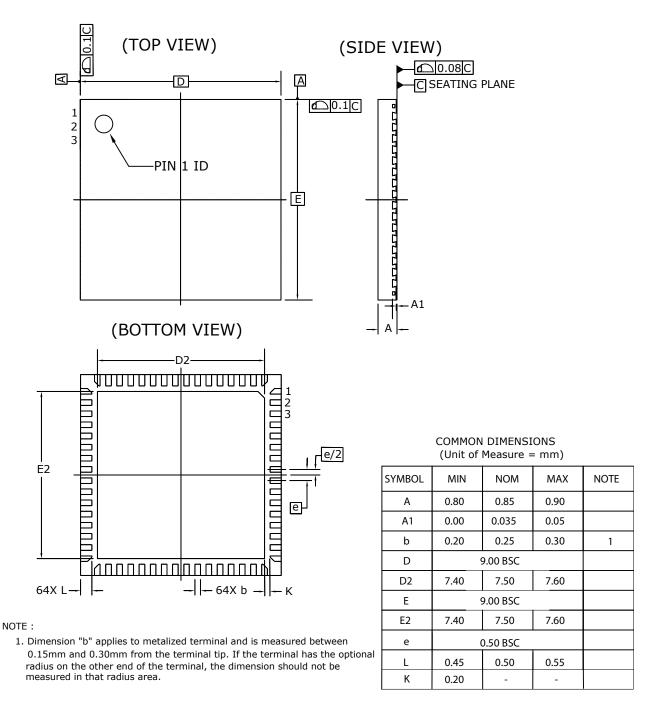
Package Dimensions: 64-pin, 9mm x 9mm x 0.85mm TQFN (0.5mm pin pitch) with Exposed Pad.
